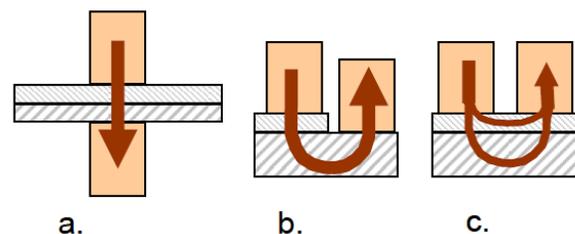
Examples of resistance welding electrode configurations: a) direct, b) step, and c) series
